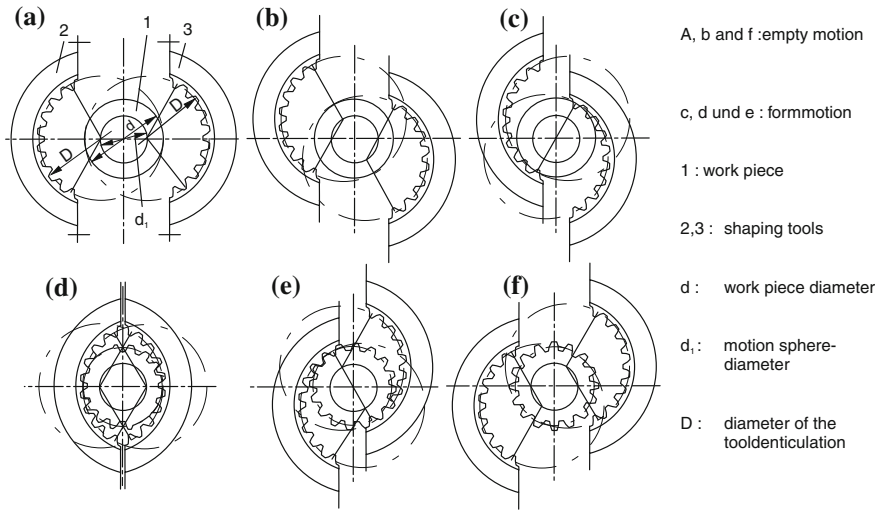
Tool position in the cold rolling of toothings according to the WPM method
